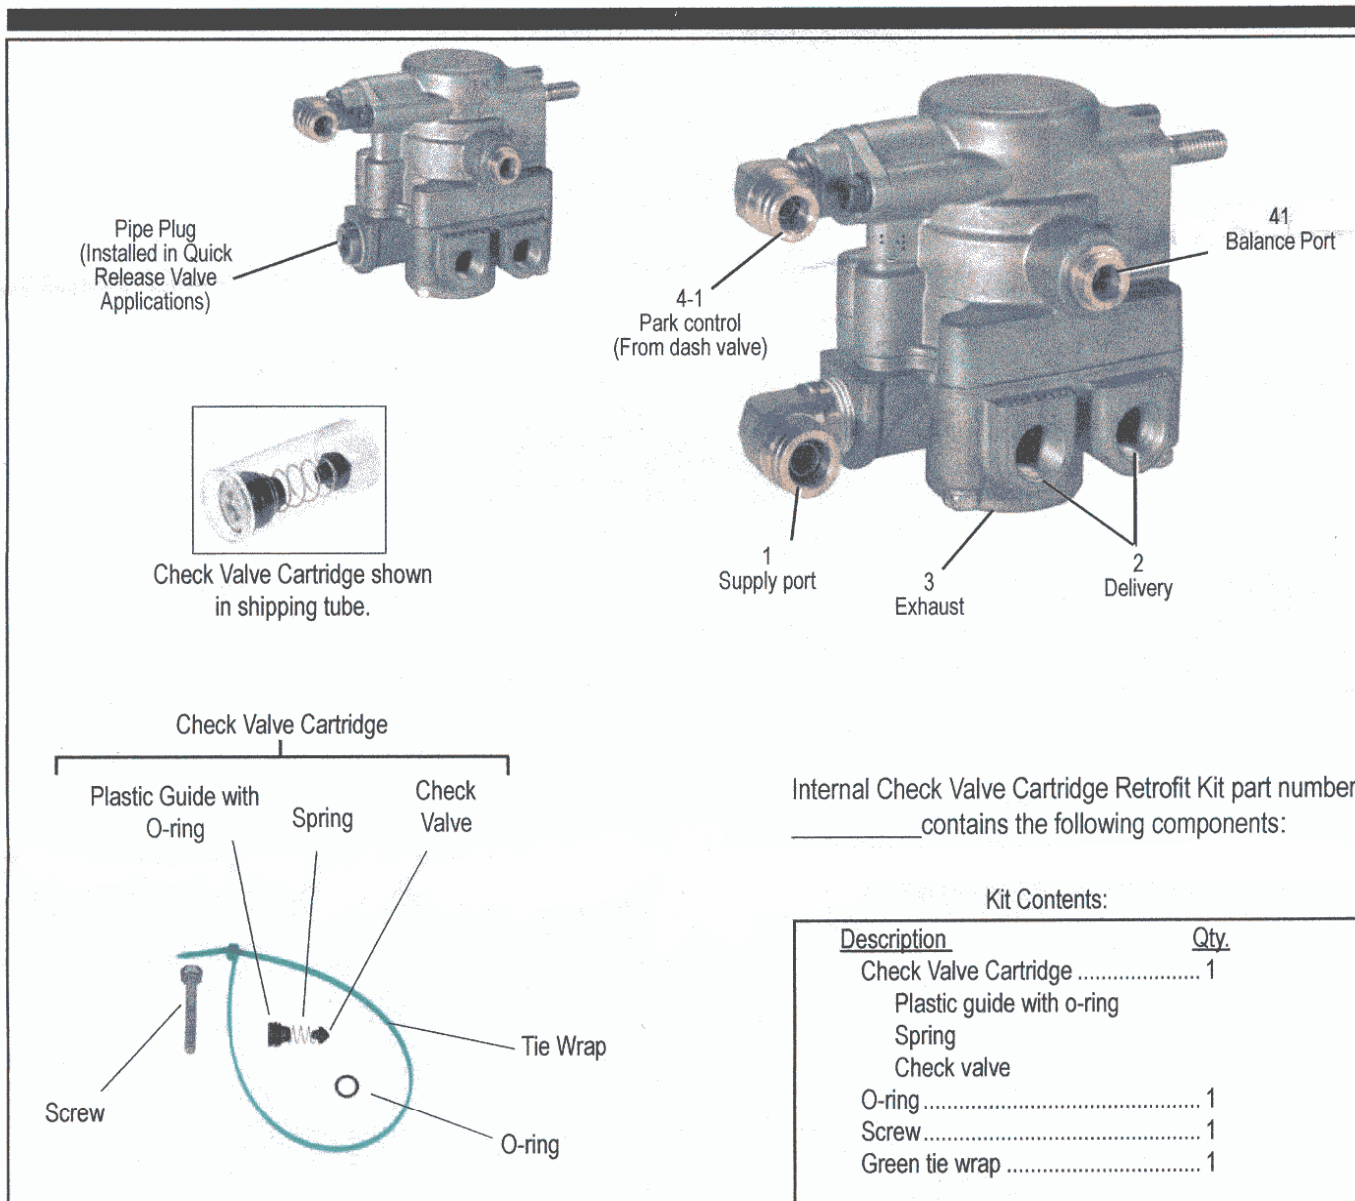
BENDIX® SR-7™ SPRING BRAKE MODULATING VALVE PORT DESIGNATIONS AND KIT CONTENTS
